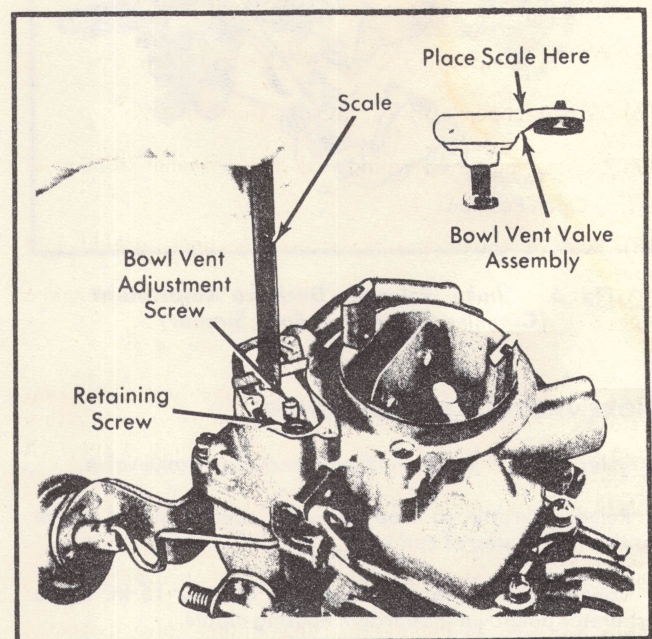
Bowl Vent Valve Measurement Using "T" Scale (Chrysler Corp.)
